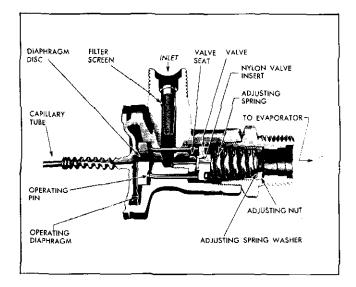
Cross Section of Thermostatic Expansion Valve
